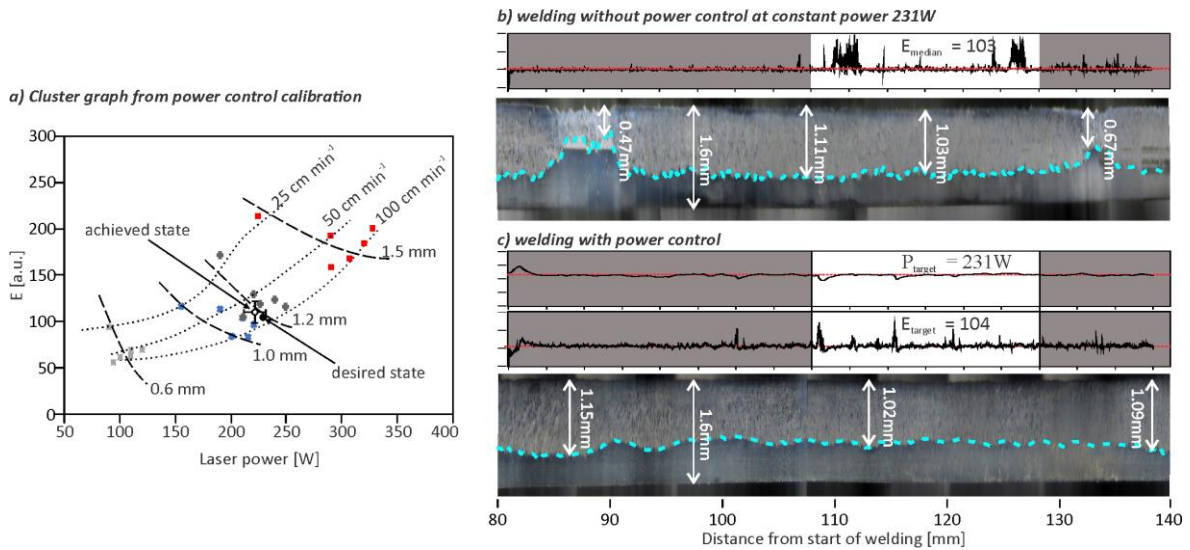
Cluster graph depicting laser power needed for full penetration at different welding parameters – material thickness, and welding speed (a). Result of welding without power control (b) and comparison to the welding with the power control (c) on a 1.6 mm lap weld at 60 cm/min with a set weld depth of 1.2 mm. Graphs show the monitored interaction area during welding (both cases) and sent laser power (power control). Macrographs present a section of the made weld where they correspond with white regions shown on above graphs. Blue dashed curves mark the penetration depth.
